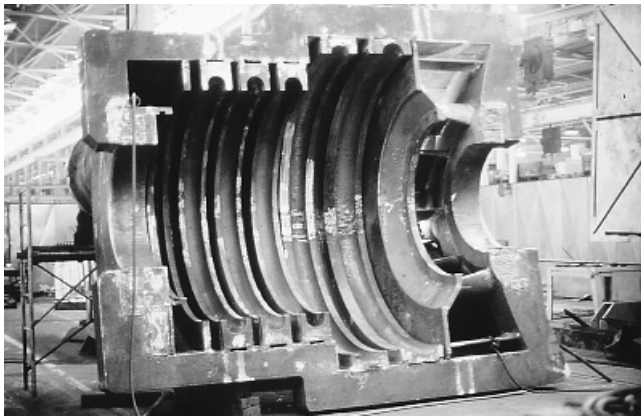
Attaching a return bend section to a compressor casing. (*Dresser-Rand Company, Olean, N.Y.*)
